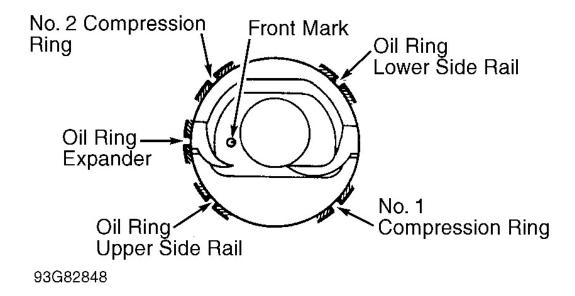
Positioning Piston Rings Courtesy of TOYOTA MOTOR SALES, U.S.A., INC.
